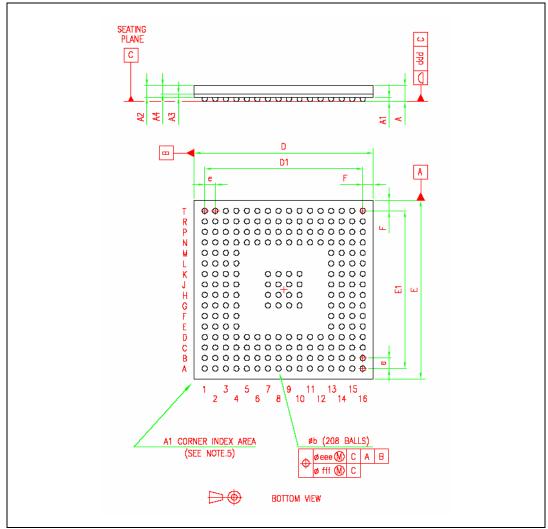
208 MAPBGA package mechanical drawing (Part 2 of 2)
